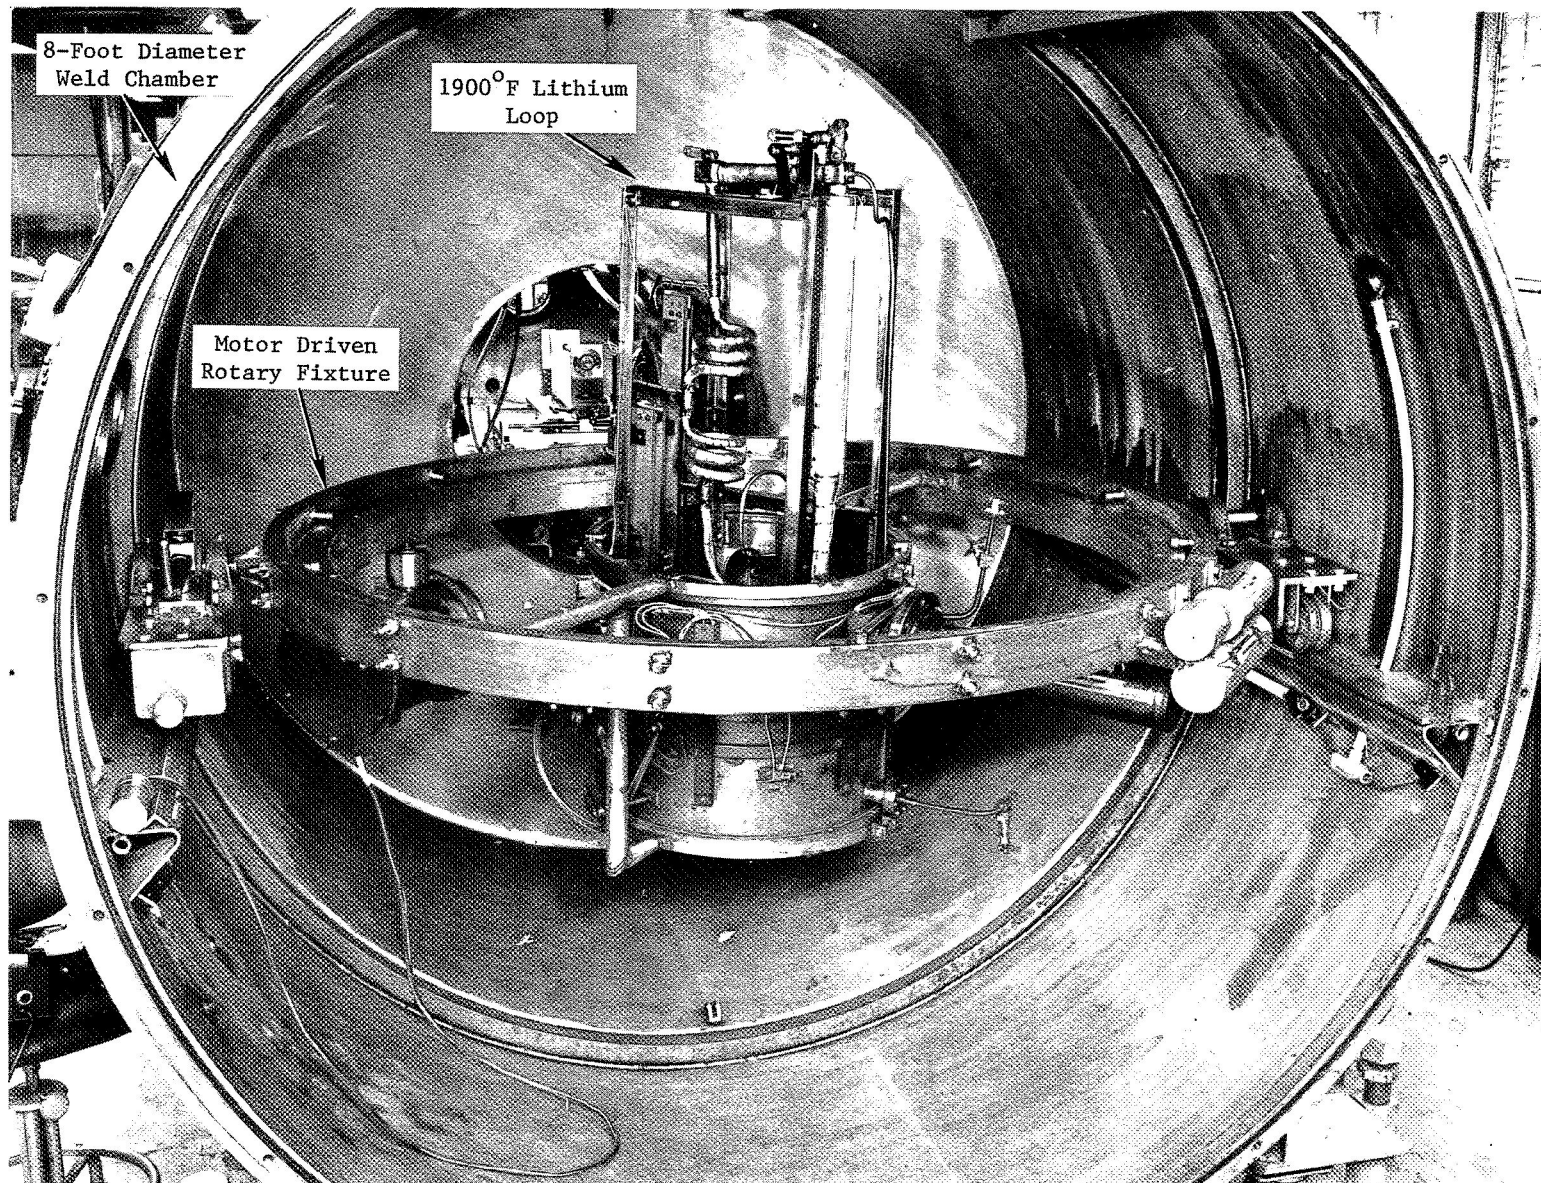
1900°F Lithium Loop Mounted on Motor Driven Rotary Fixture in 8-Foot Diameter Weld Chamber. (Orig. P70-6-3A)
